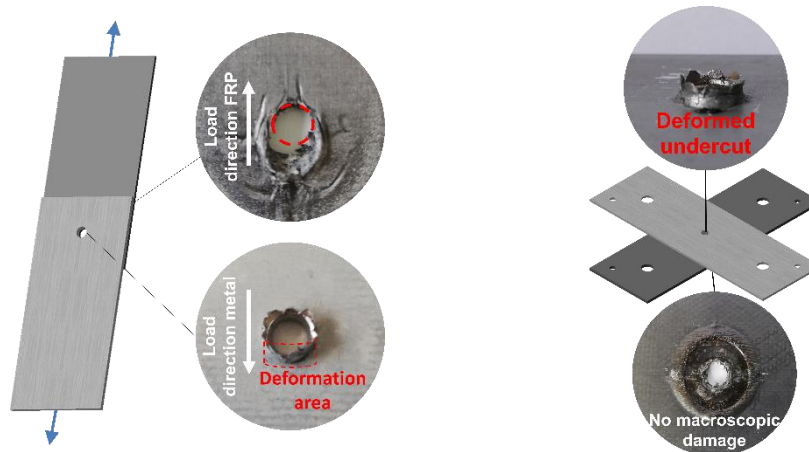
Macroscopic failure profile of tested FDJ joints due to shear (I) and cross tension (r) loads
